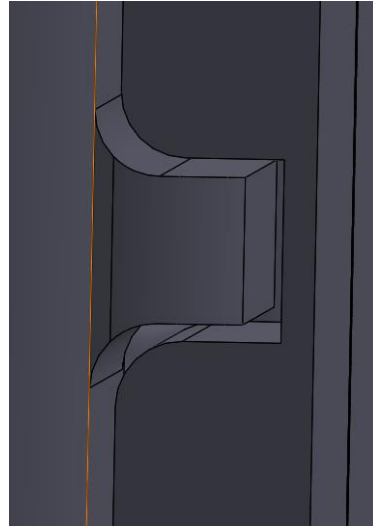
Highlighting the clearance fit in sliding mechanism for the drip tray and drip tray housing
